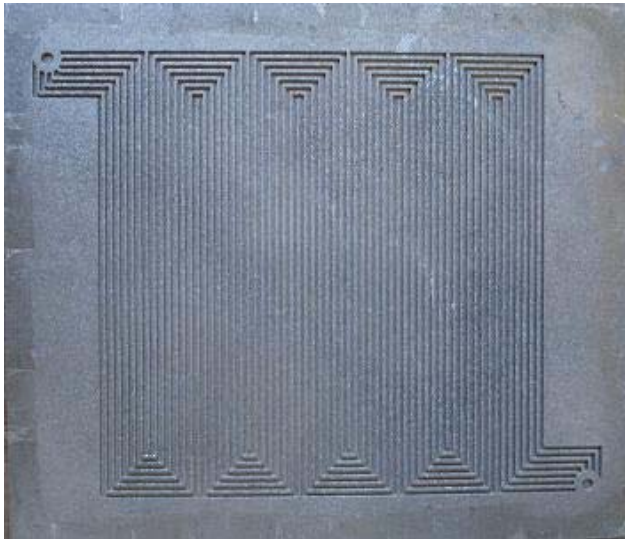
One side of a PPS based laminate polymer composite bipolar plate showing the 7-channel parallel serpentine style design. Plate dimensions are 140 x 120 mm. Channel dimensions are 0.8 x 0.8 mm.
